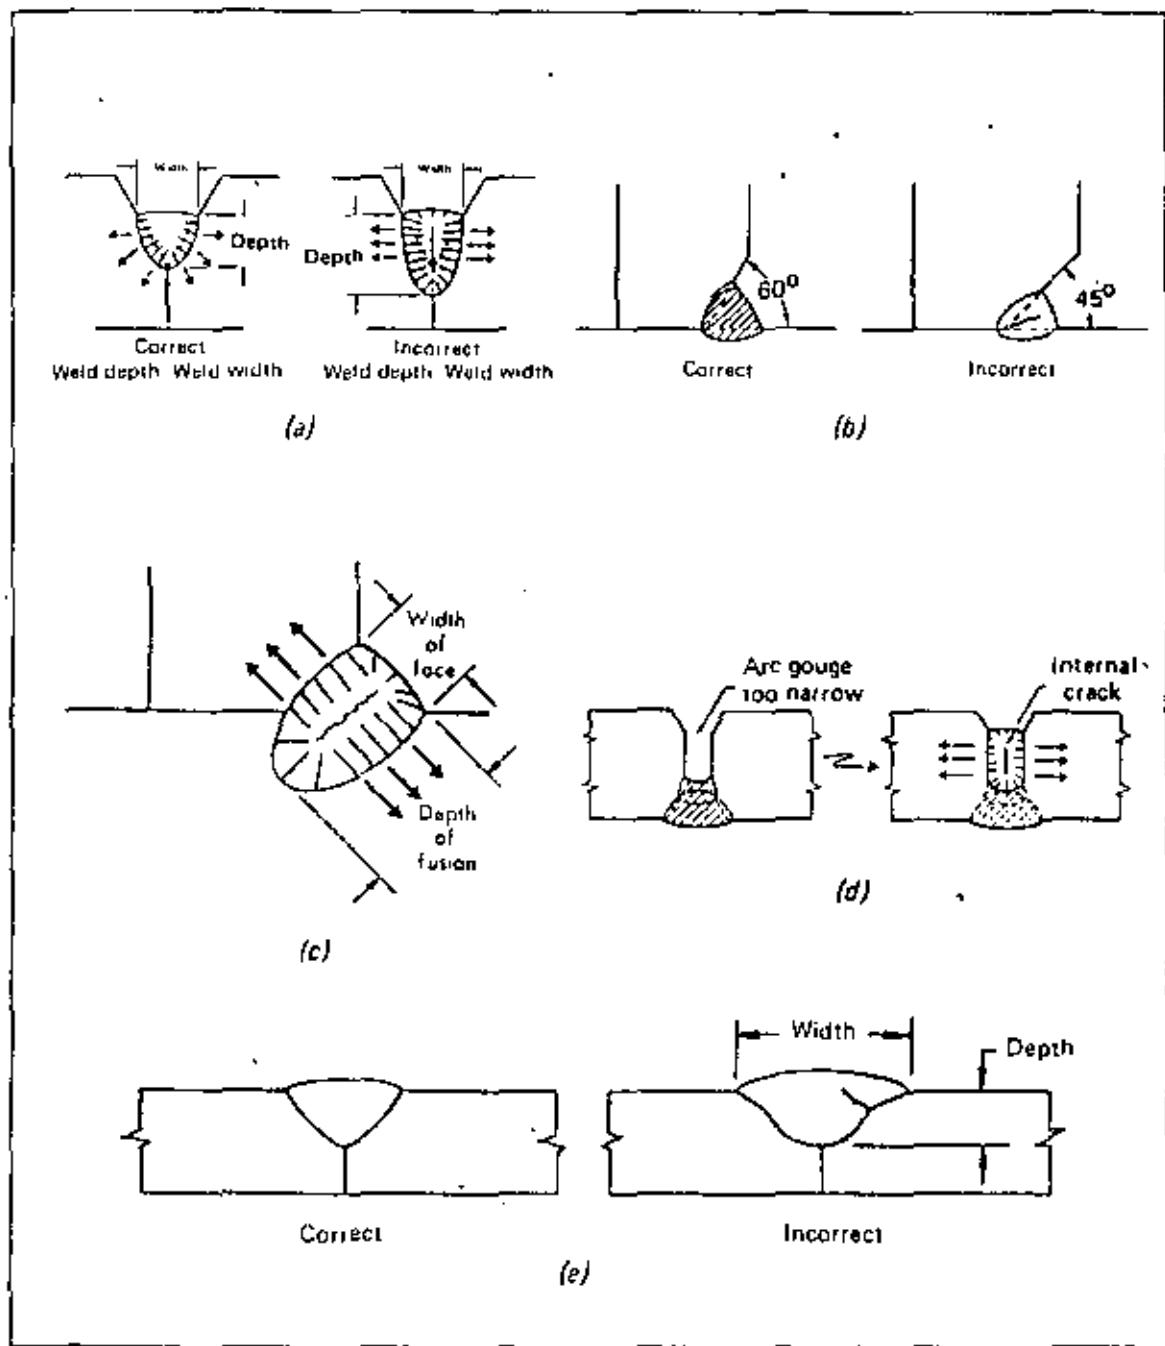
Internal cracking can occur when weld penetration is greater than width. Correct and incorrect proportions are shown in (a), (b), and (c). Arc gouging a groove too narrow for its depth can cause a similar internal crack (d). Cracks can also occur when depth is too shallow (e). Width of a weld should not exceed twice its depth.
